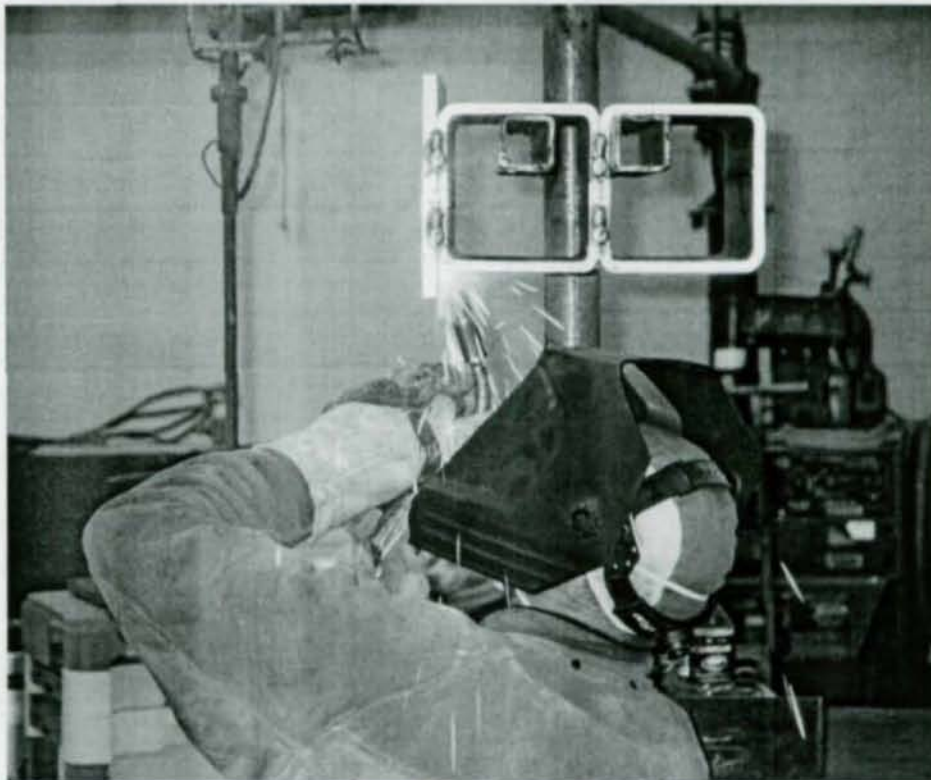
Overhead Welding (Close-up) of Test Specimen at Walters Inc.
